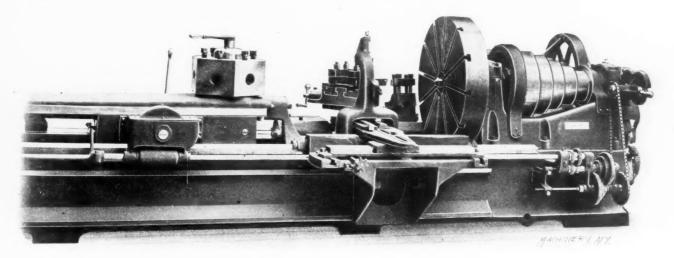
Rear View of Lathe, showing Special Feed Mechanism for Turret Lathe.
